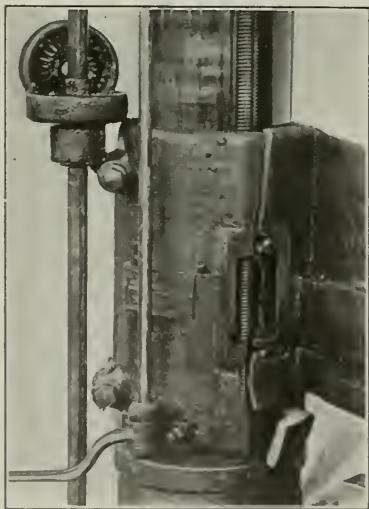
CAST IRON HOUSING SUPPORTING ARM OF RADIAL DRILL BROKEN IN THREE PARTS
